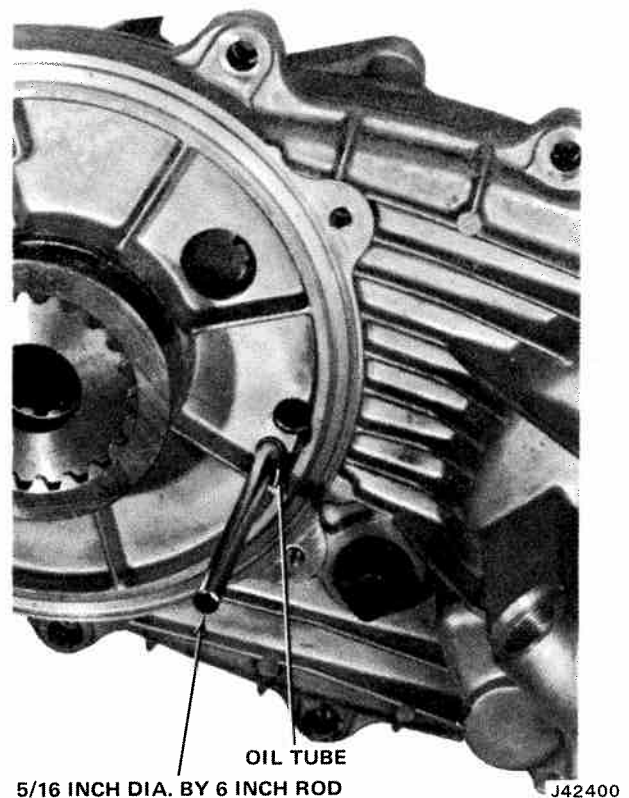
Aligning Oil Tube for Cover Assembly Installation
